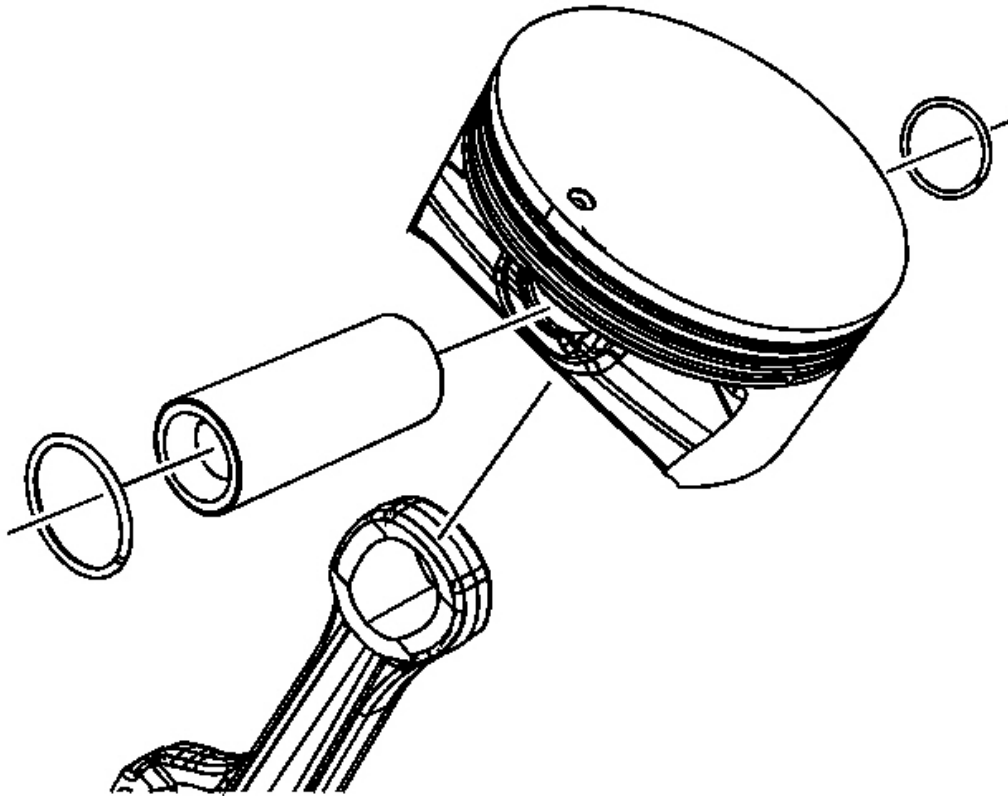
View Of Piston Pin, Piston & Connecting Rod
